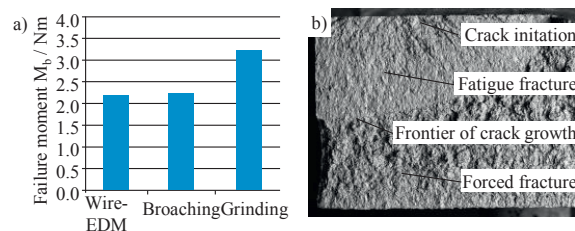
Failure moment for 50% failure probability (a) and fracture surface of EDMed specimen (b)
